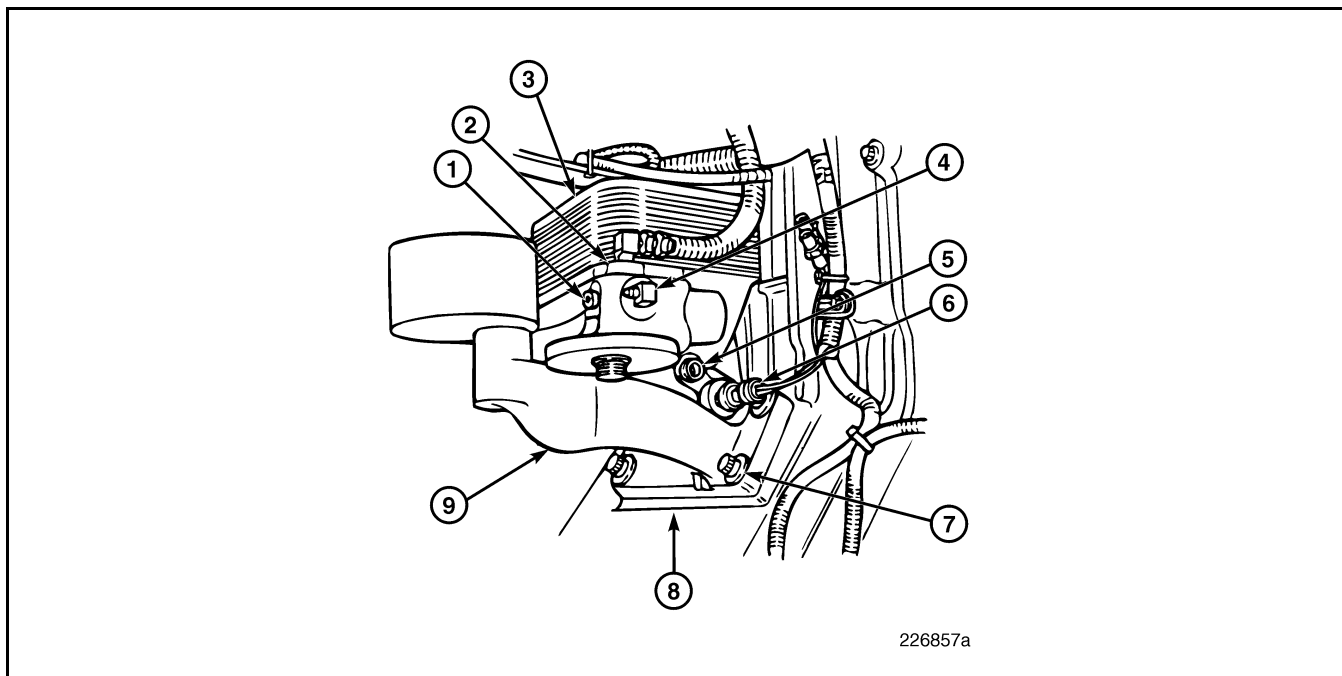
Plate-Type Oil Cooler and Oil Filter Mounting Bracket Removal
